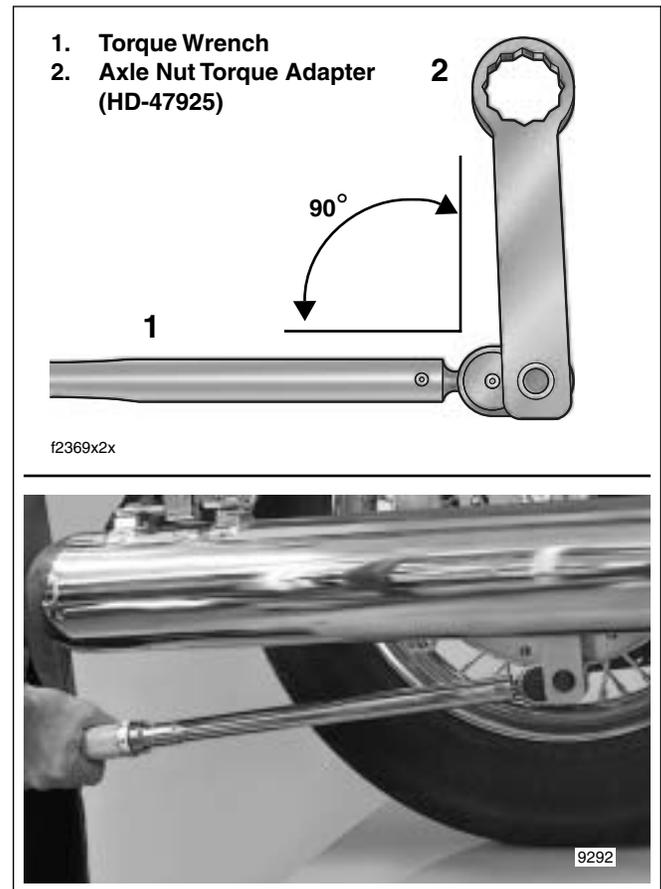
Install Tool Perpendicular to Torque Wrench
